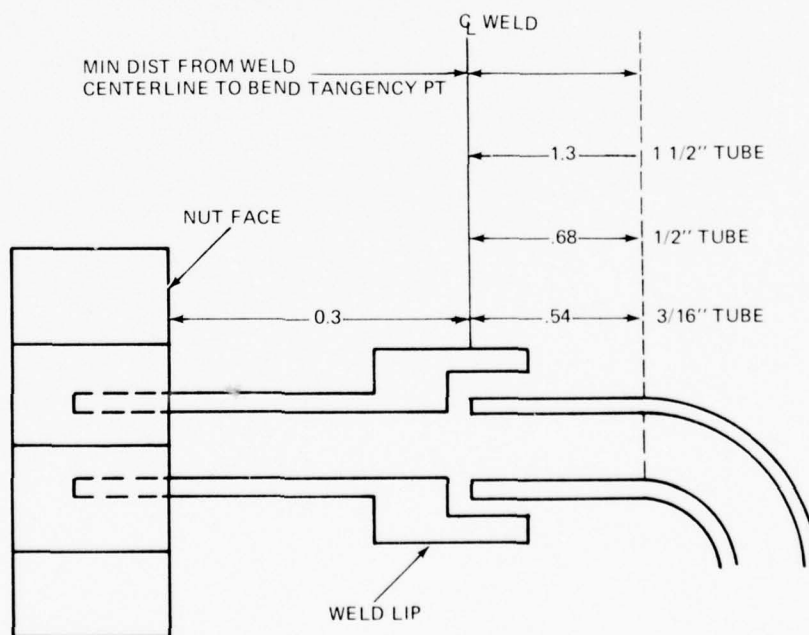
Minimum Distances From Weld Center-Line to Bend Tangency Point
